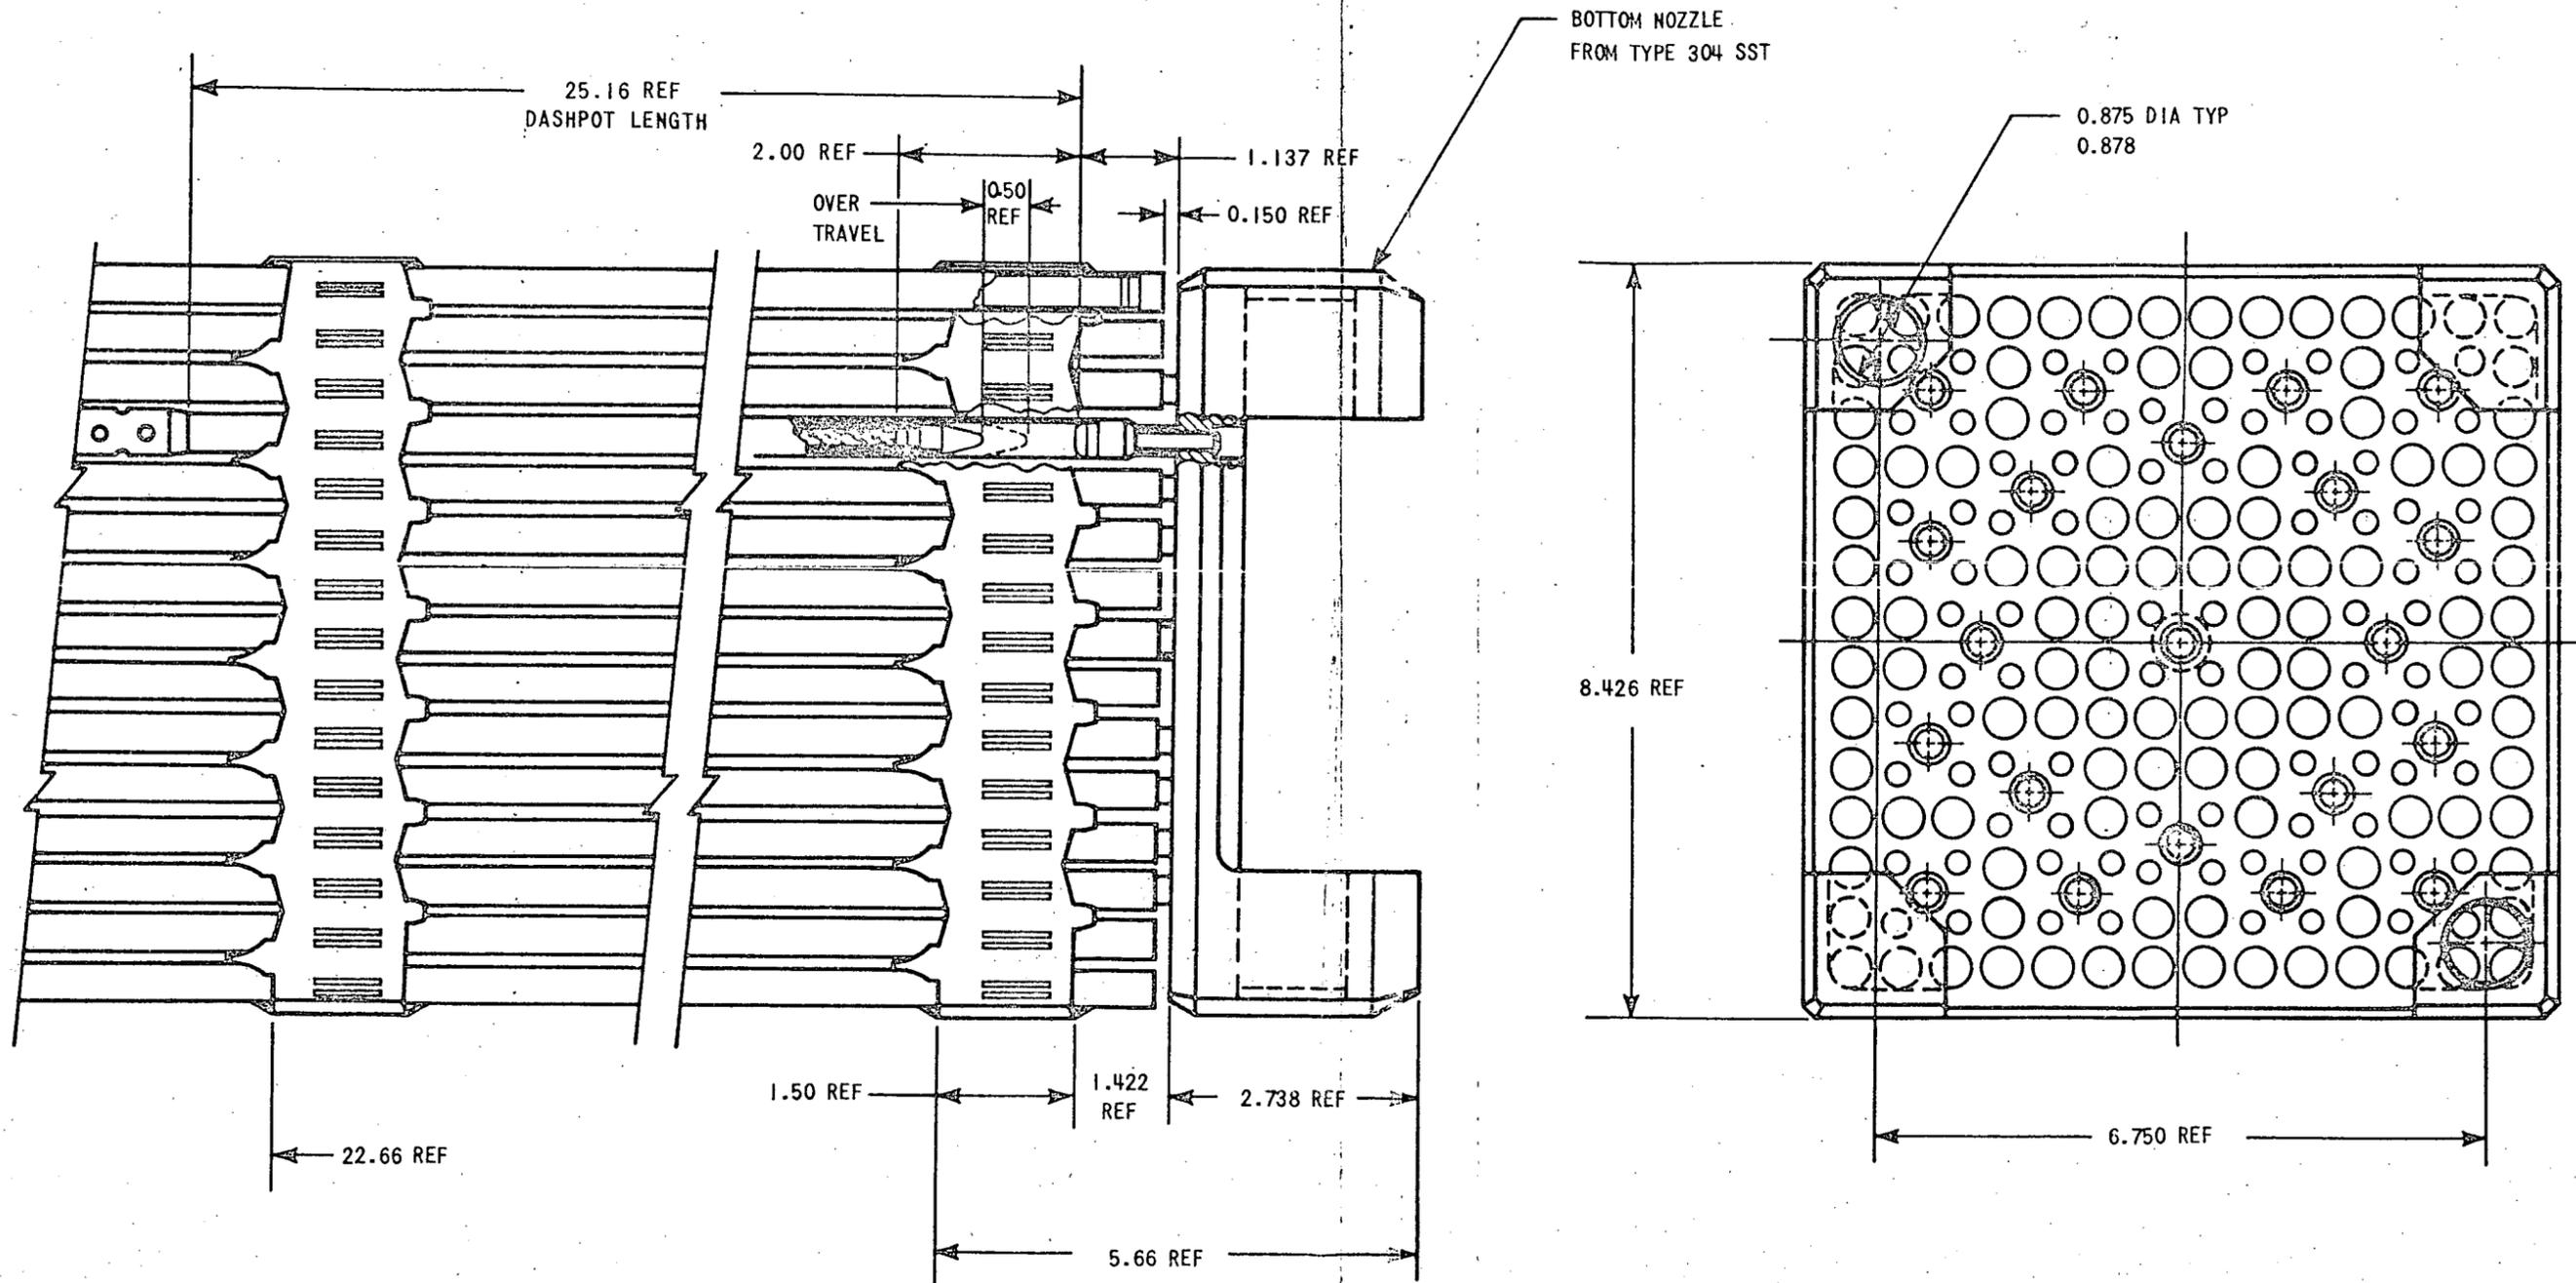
Bottom End of Fuel Assembly Showing Plate Type Bottom Nozzle
